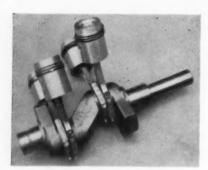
Modern compressor crankshaft and rod assembly, 4-cylinder double throw
